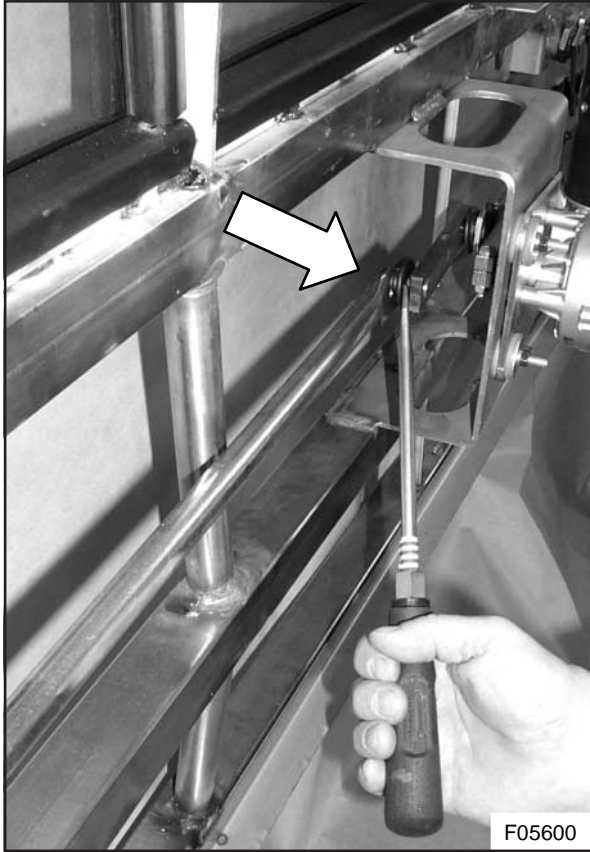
LH wiper tie bar inner knuckle joint (step shown on test stand)
